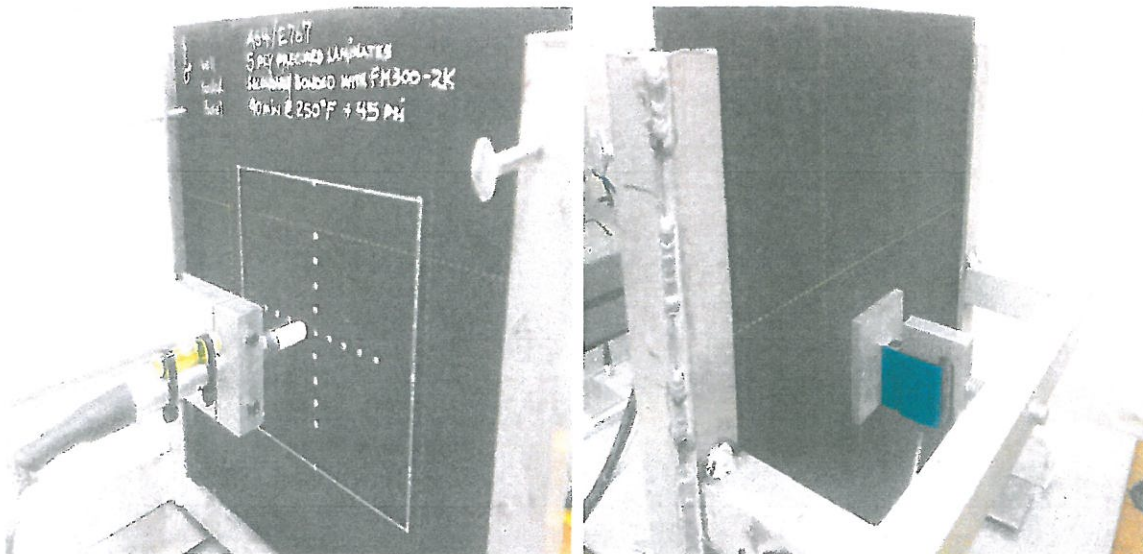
Illustration of fixture holding the 305 mm x 305 mm (12 in. x 12 in.) bonded laminates tested using the Perimeter®.
